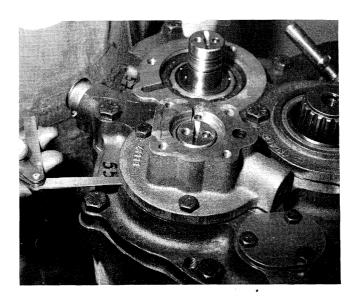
Measuring shim space between pump mount and the rear cover.
